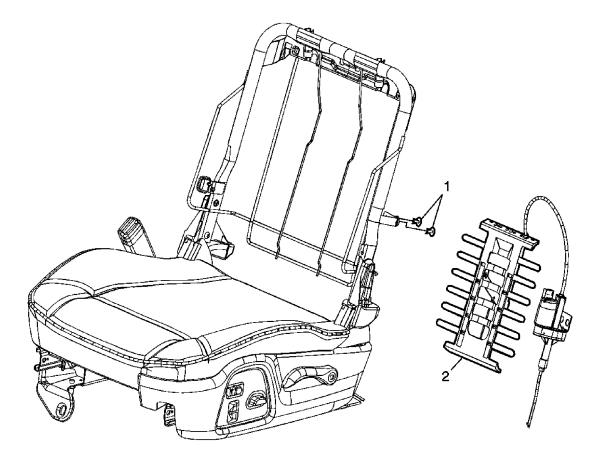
Replacing Front Seat Lumbar Support Courtesy of GENERAL MOTORS CORP.
